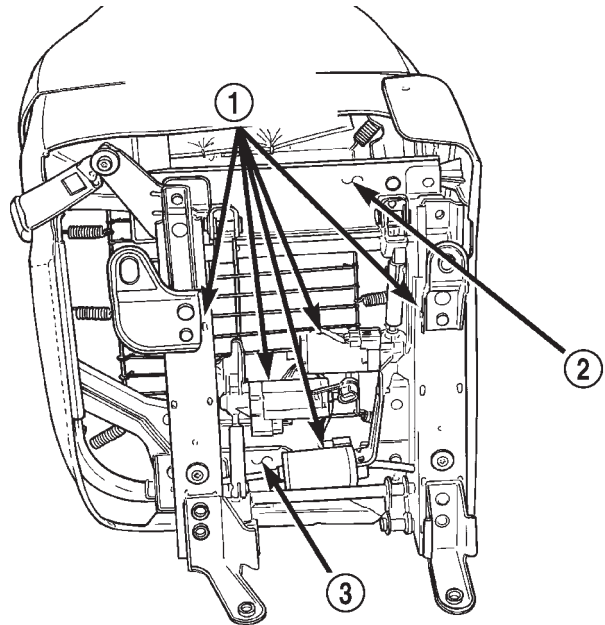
Power Seat Adjuster and Motors Remove/Install
